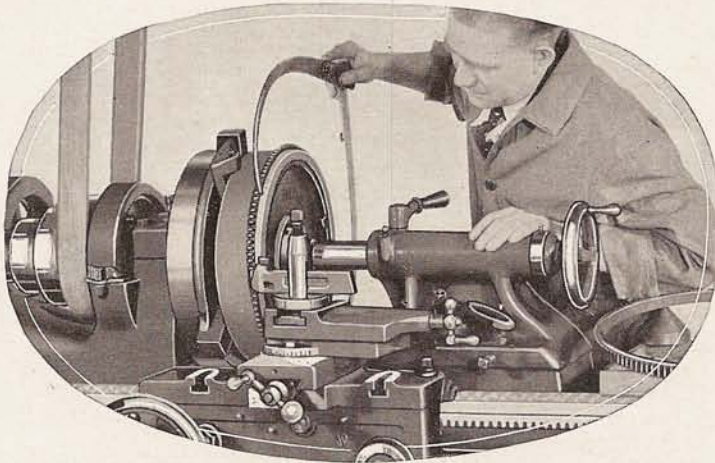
Machining a Flywheel for a New Starter Gear in a 16-inch Lathe.
